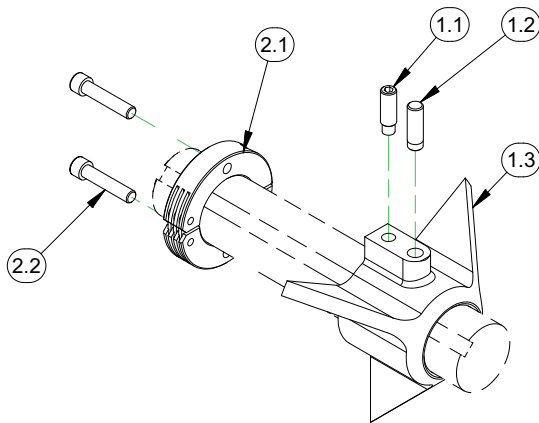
ID BEARING MOUNT ASSEMBLY (P/N 46293)
